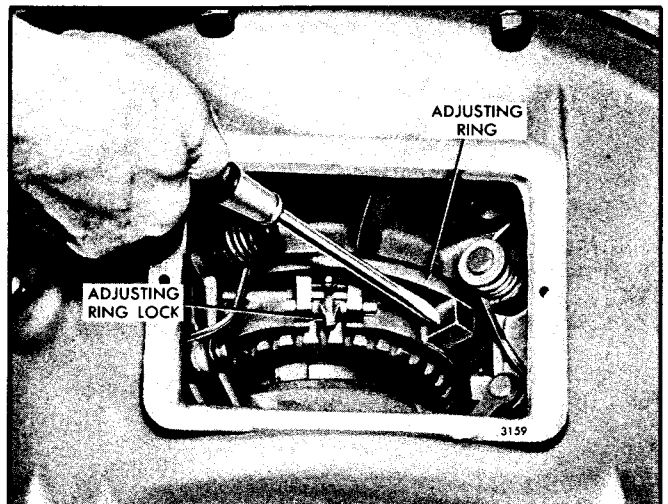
Power Take-Off Assembly Showing 14 Inch Diameter Clutch Adjustment Ring
